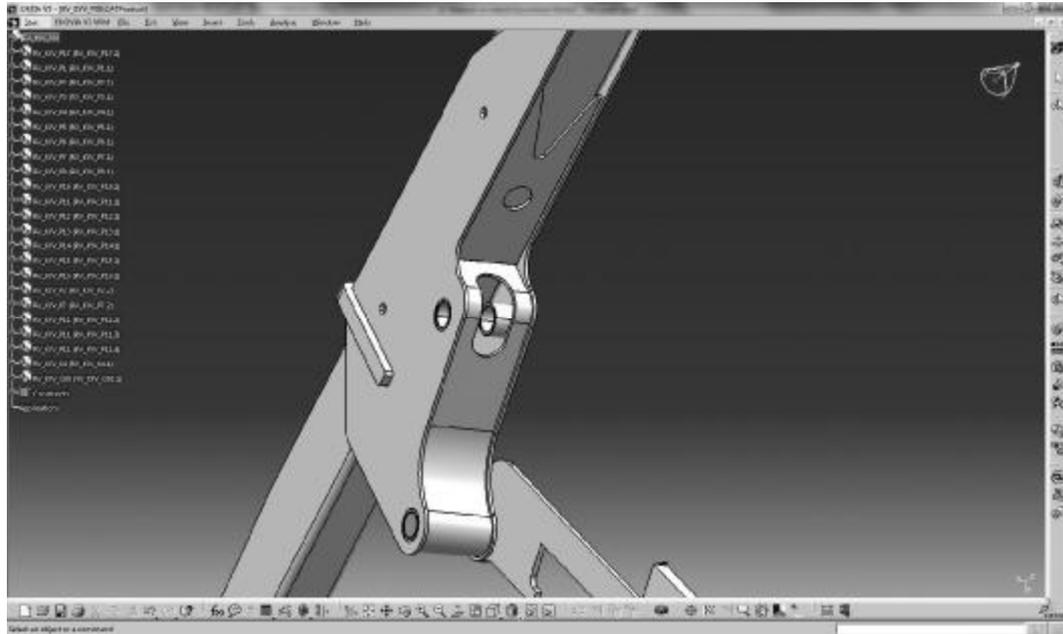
View of a subassembly in CATIA V5 assembly workbench
